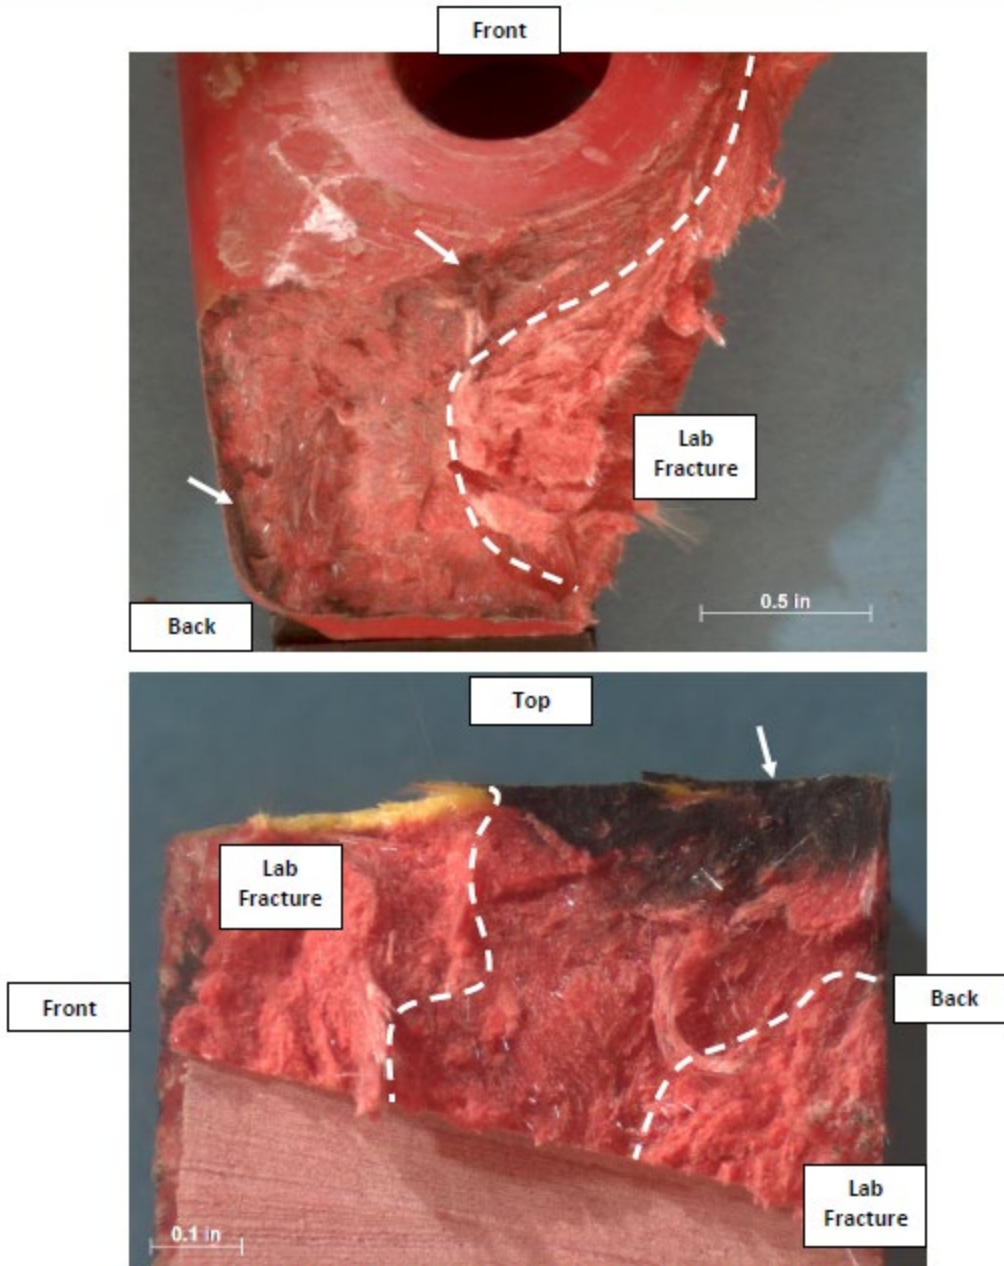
Macrographs of the opened fracture surfaces from the base of Sample 1-1 (top) and the yellow material at the top of Sample 1-2 (bottom). The service fracture of Sample 1-1 follows the circumference of the washer indentation and leads down the back of the bracket base at an angle. Both service fracture surfaces were smoother and exhibited a duller appearance compared to the lab fractures. A dark discoloration was observed on the fracture surfaces along the exposed surfaces (white arrows).
